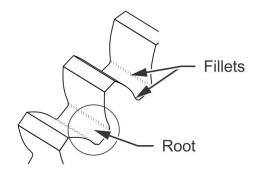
Camshaft Gear Inspection Surfaces, typical
